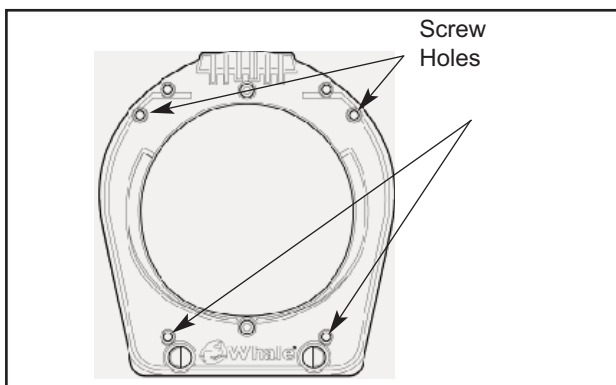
View Of Mounting Positions (Ommiting The Handle)
